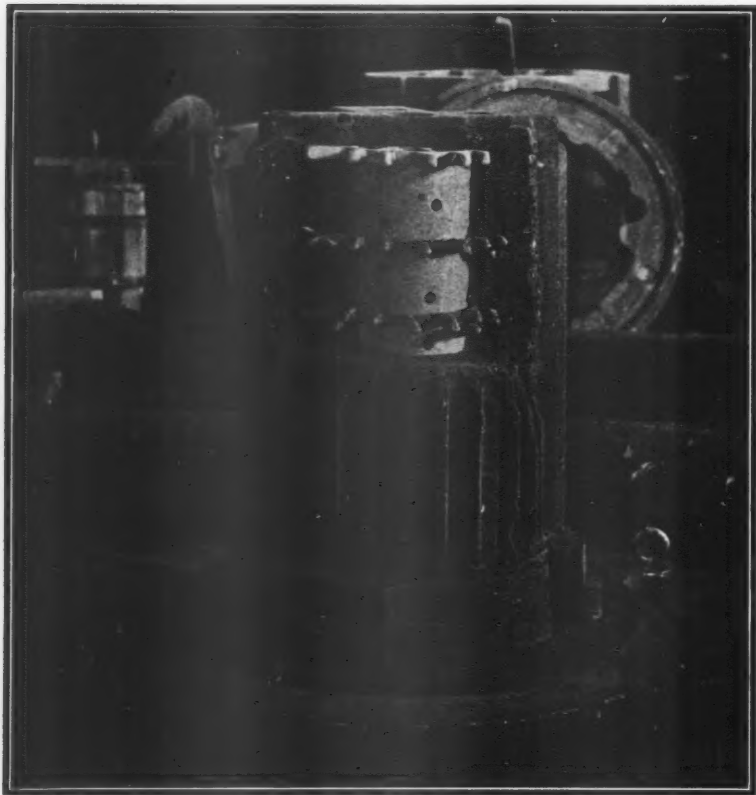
TRANSFORMER CASE CORE RAMMED ON A MUMFORD JOLT RAMMING MACHINE.
